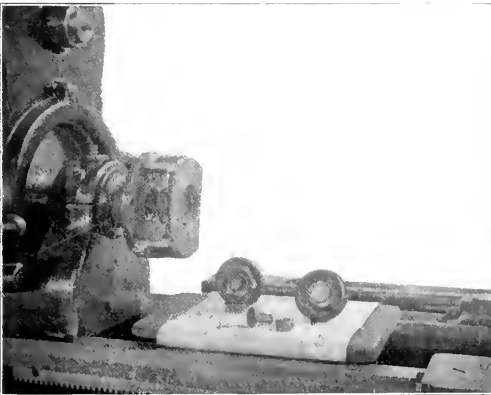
Chuck for Repairing Worn Air Pump Check Valve Caps
